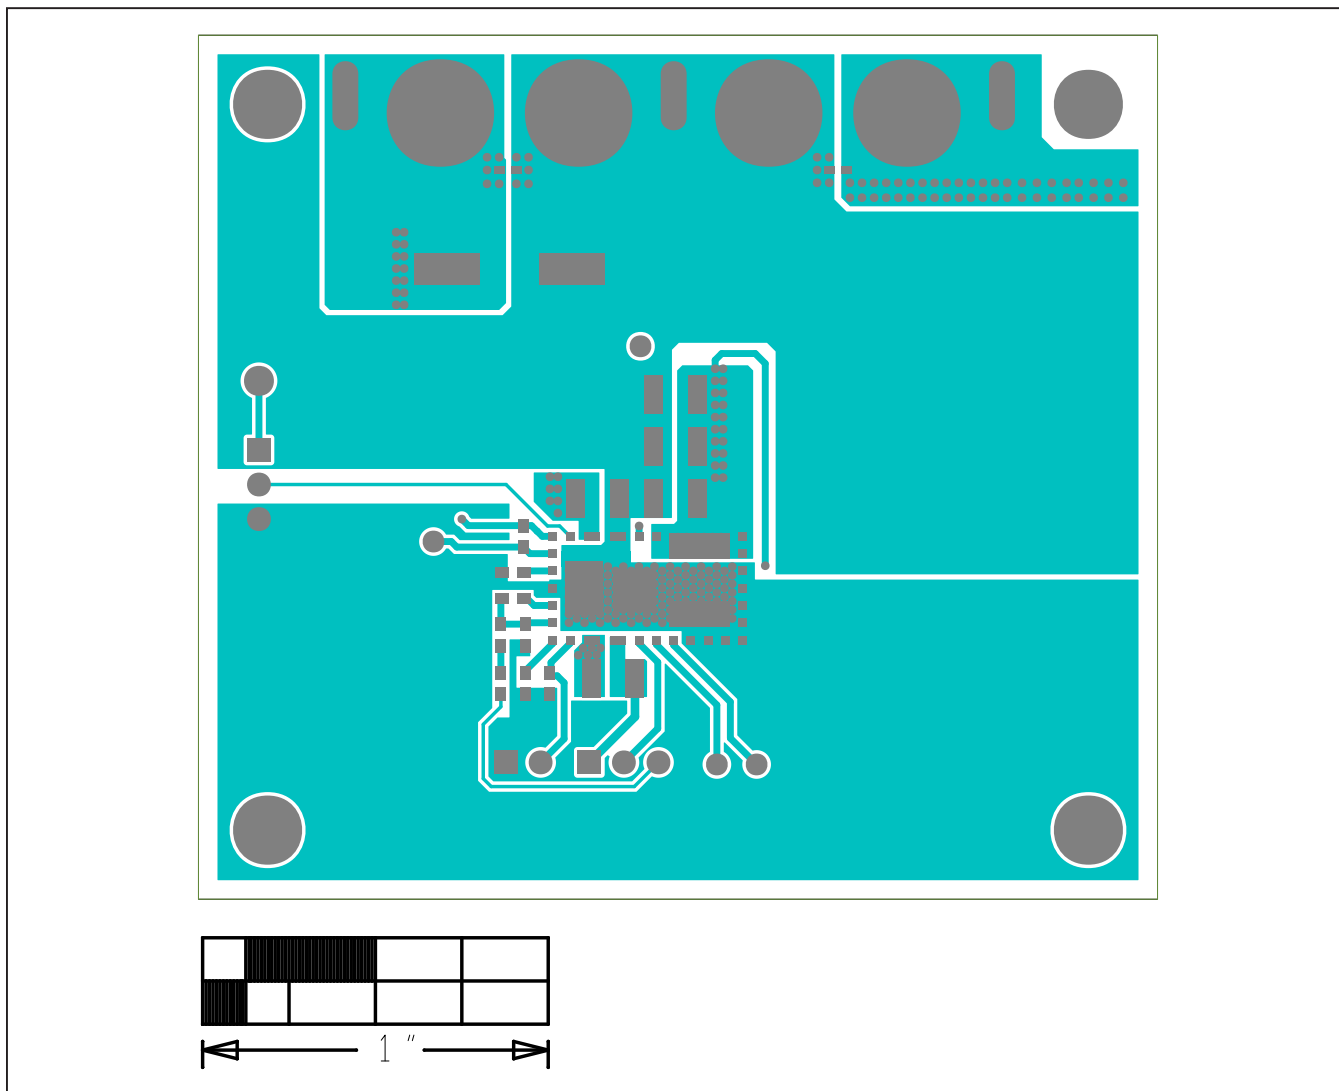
MAXM17546 5V Output EV kit PCB Layout---Top Layer
